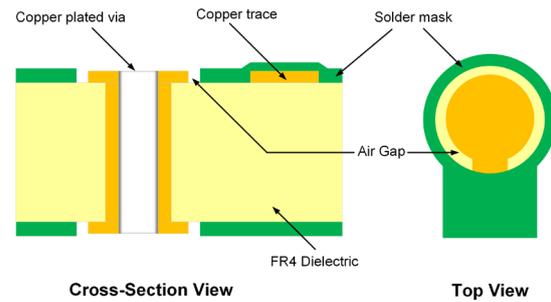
Cross-section and top view of solder masks represented in the numerical model.
